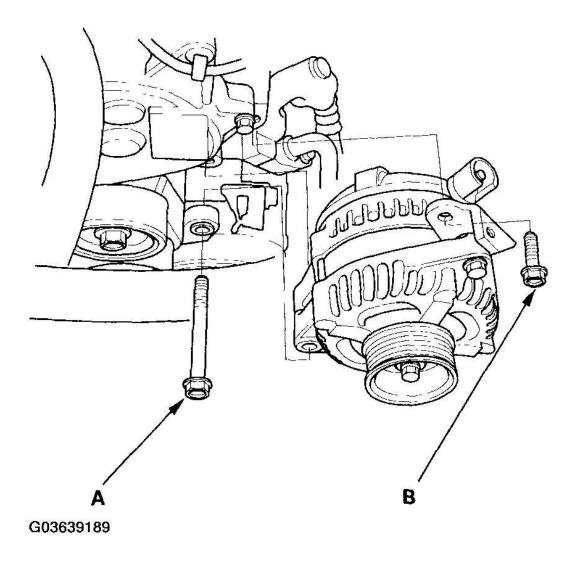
Removing Mounting Bolt And Alternator Bracket Mounting Bolt Courtesy of AMERICAN HONDA MOTOR CO., INC.
